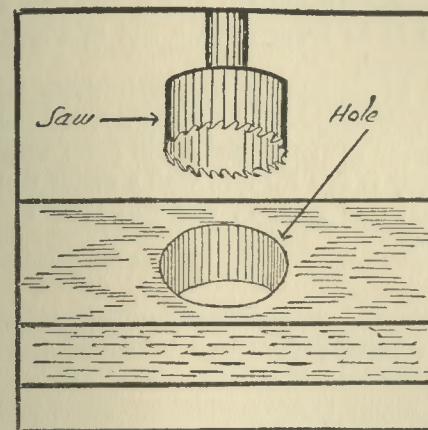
HOW TO SAW OUT DISKS AND CIRCULAR HOLES
